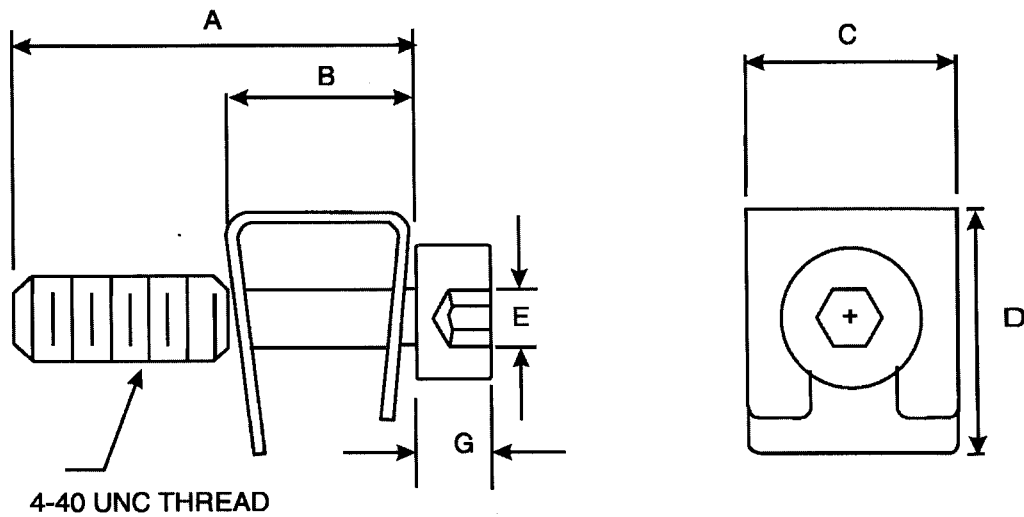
PHYSICAL DIMENSIONS (CONTINUED)
